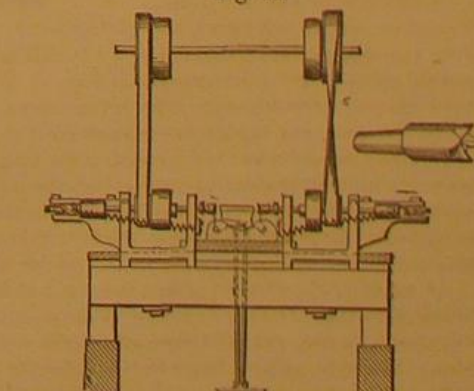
is a machine for riveting hinges. Peculiarly shaped revolving milling tools spread the pintle when forced against it, and form the head.
